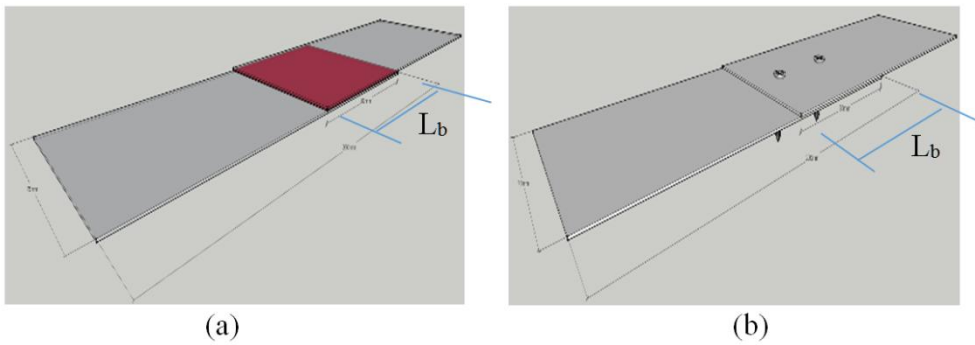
Specimen dimension Adhesive and Screw specimen (all units in mm)
